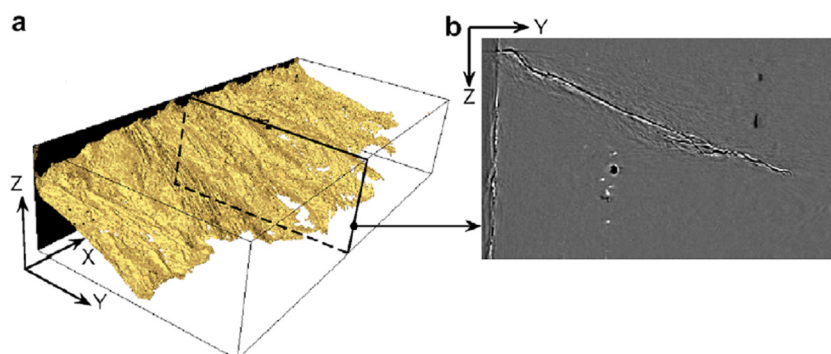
(a) 3D rendered image of a fretting fatigue crack (b) 2D slice of the crack showing the crack path at this location [122].
